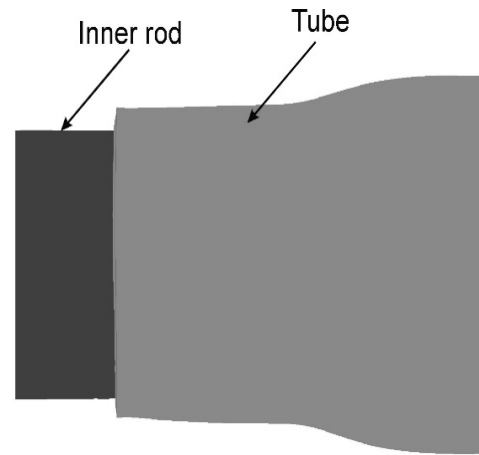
Al6061 T6-Flyer (Before weld)
